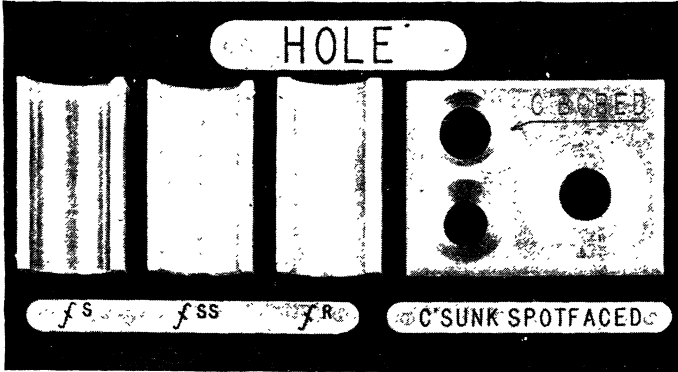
Examples of three different types of finished holes; also counterbored, countersunk, and spot-faced holes.
